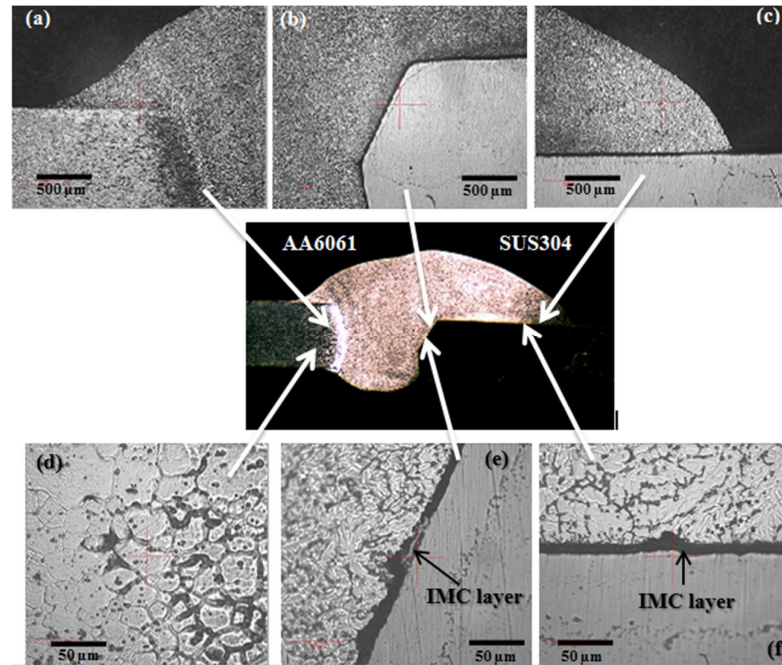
Microstructure morphology of the welded joint at 5× magnification; (a) aluminium joint, (b) inner steel joint, (c) top steel joint and at 50× magnification; (d) transition region of aluminium, (e) inner IMC layer, (f) top IMC layer.
